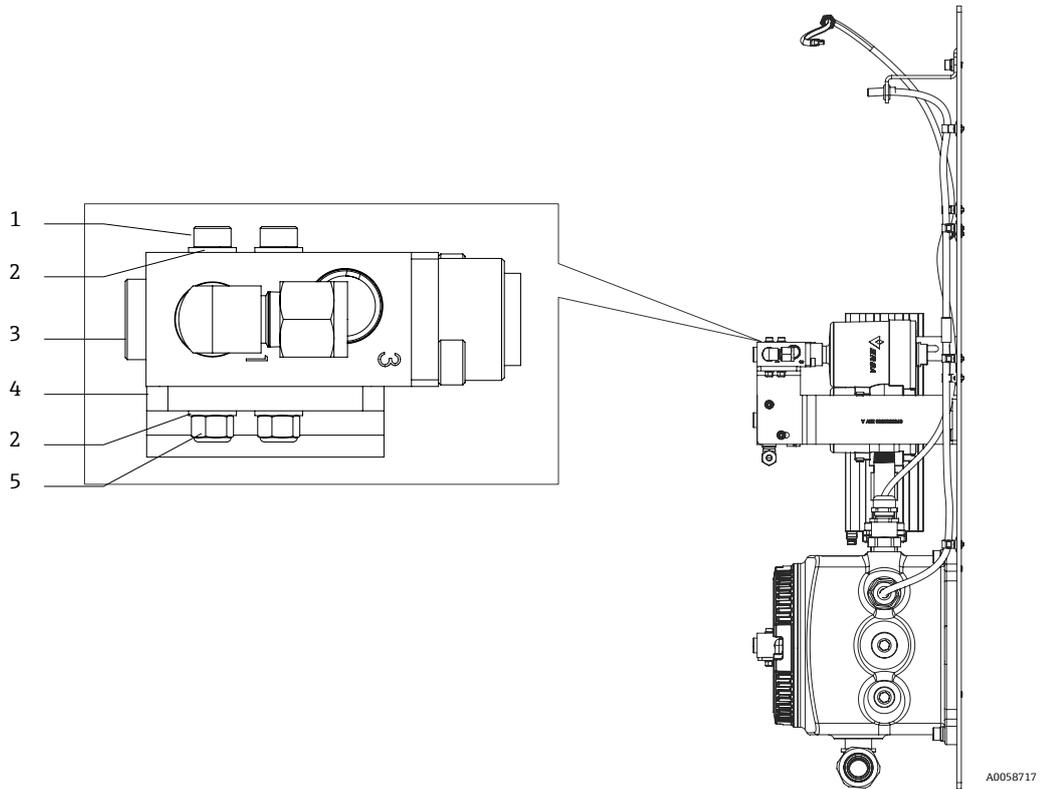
Side view of solenoid valve installed into MAC with detailed view of the valve installation
